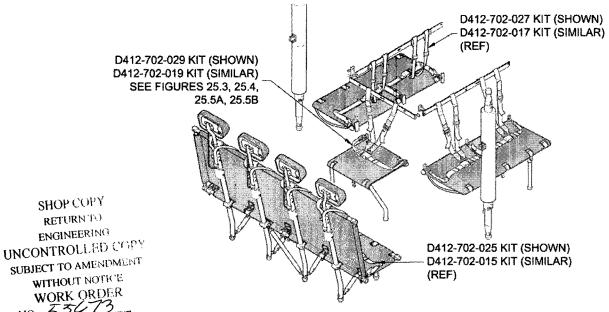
DART D412-702-019/-029 1-MAN 4-POINT SHOULDER HARNESS KIT (D412-702-029 KIT SHOWN, D412-702-019 KIT SIMILAR; D412-702-025/-027 KITS SHOWN FOR REFERENCE, D412-702-015/-017 KITS SIMILAR)
